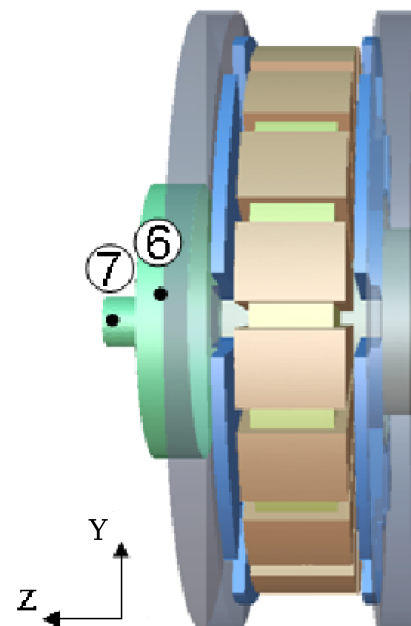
Durham generator components side view; (6) Flange, (7) Shaft
